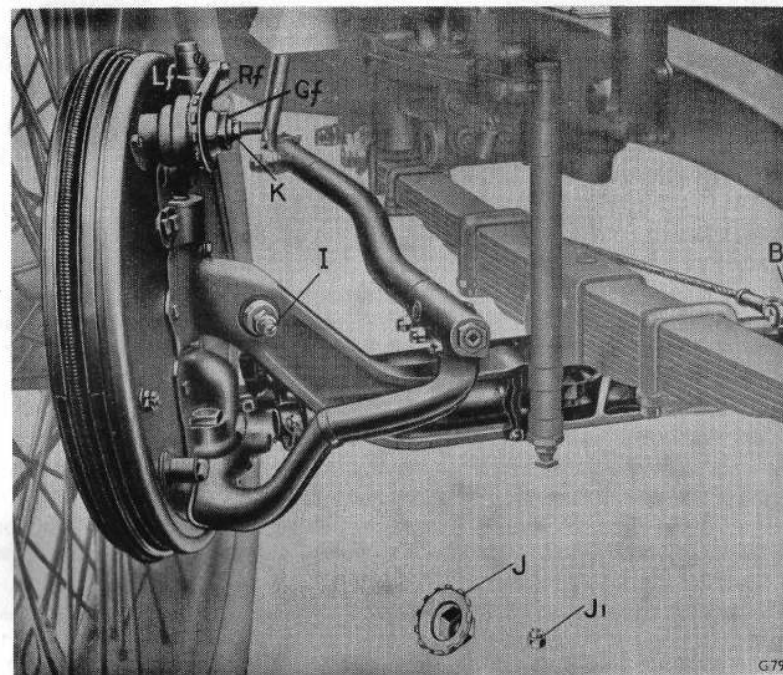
FRONT WHEEL BRAKE ADJUSTMENT.
